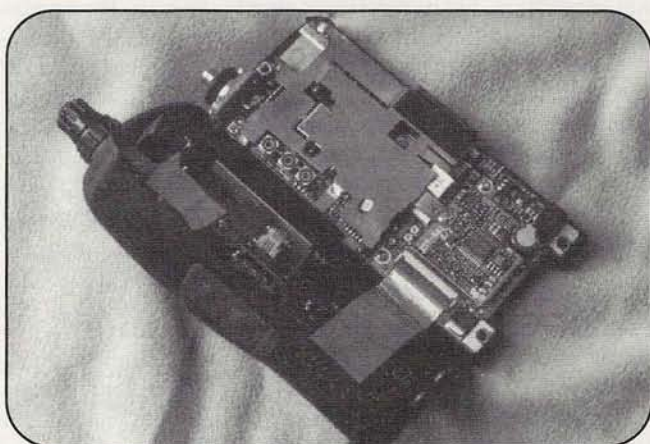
Photo D. Once the radio is opened, you'll see two circuit boards, connected by a ribbon cable. One board is attached to the back plate that you just removed, and the other is attached to the front section of the radio. You'll need to access the front board to make the frequency coverage mods.
